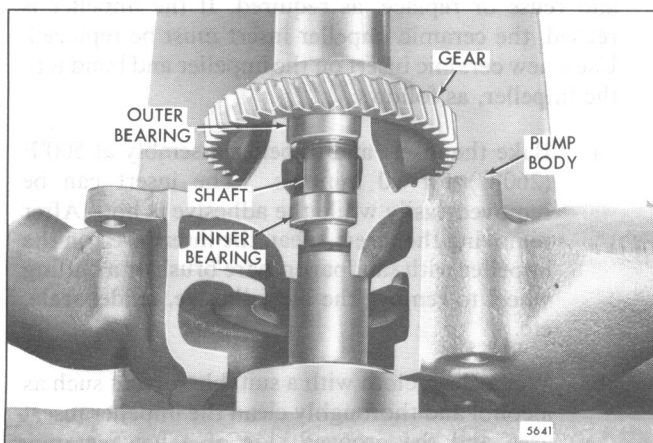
Pressing Gear on Pump Shaft using Tool J 25257
